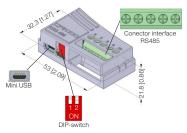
CFW100-CRS485 dimensions in mm [in] and connectors location
